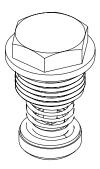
Valve Assembly (NOTE: There are two different valve plug designs)
